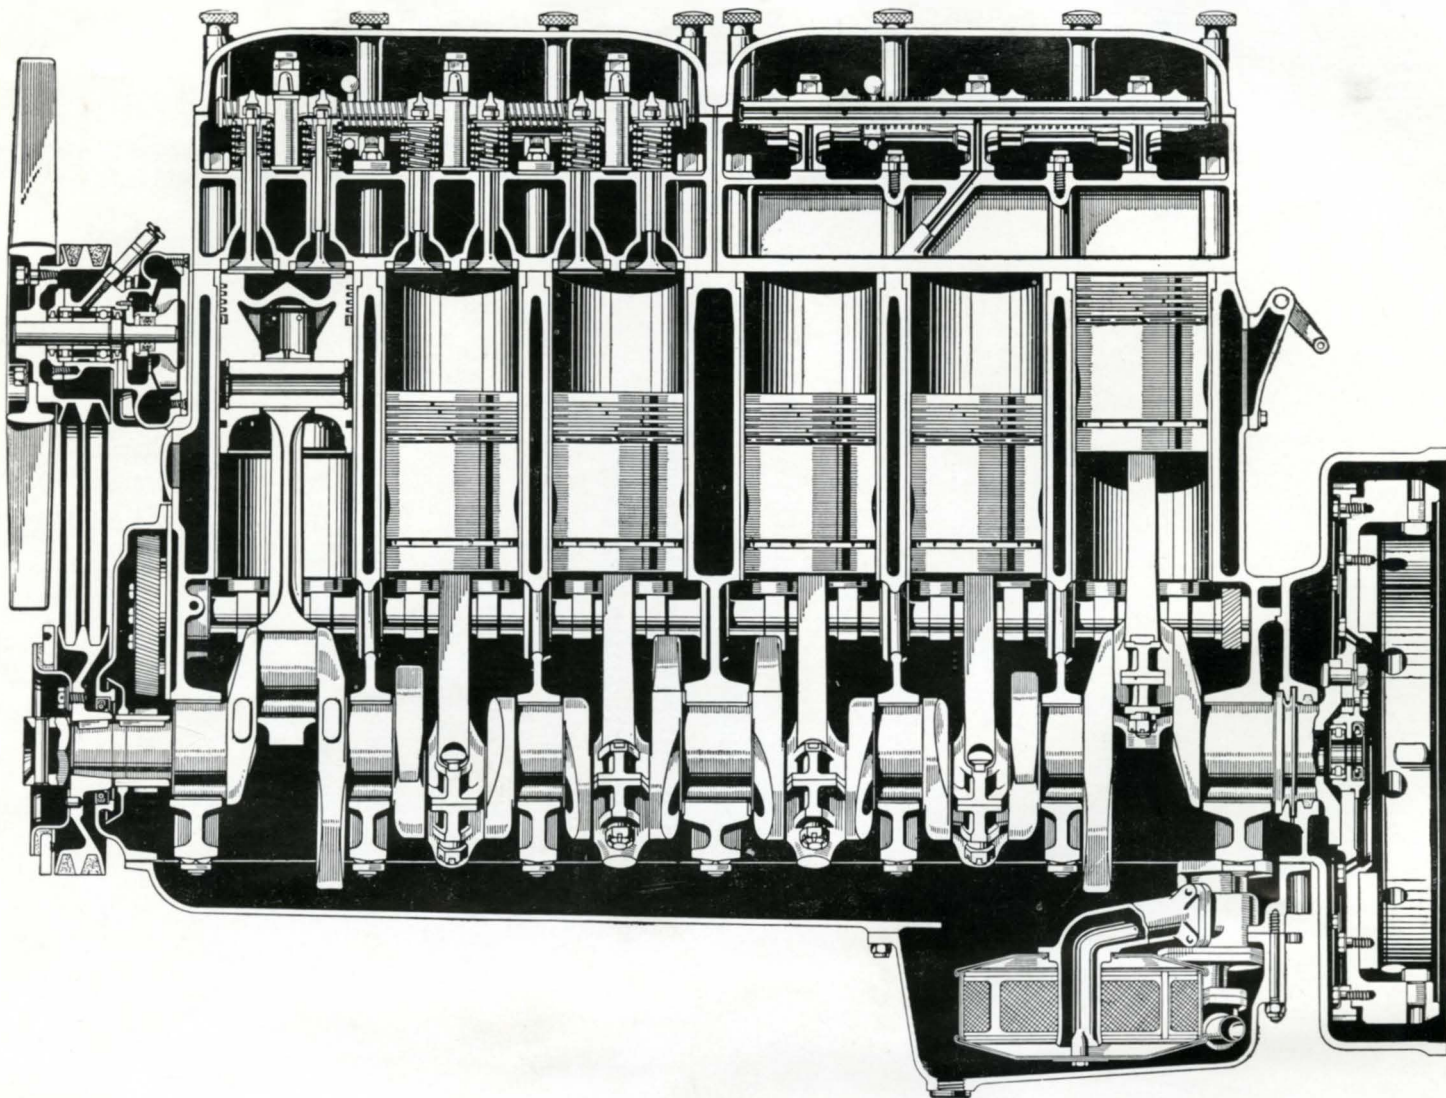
TYPICAL SECTIONAL VIEW THROUGH ENGINE
